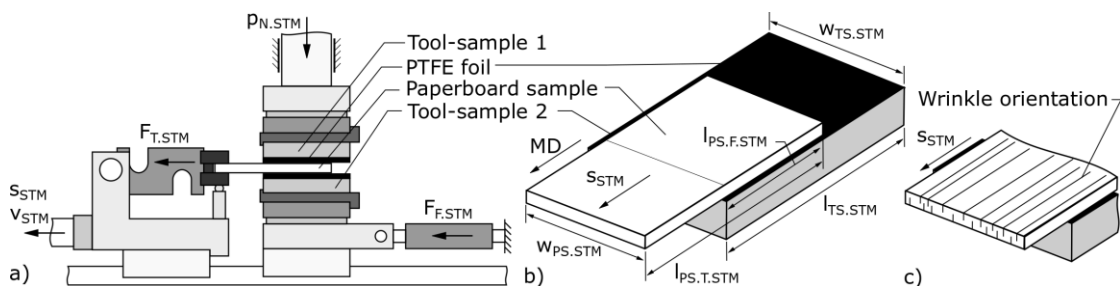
a) Schematic side-view of the Strip-testing method (STM) according to Lenske *et al.* (2017b) with tool-samples prepared with PTFE-foil; b) Schematic detail-view of tool-sample 2 and a paperboard sample; c) Schematic detail-view of tool-sample 2 and a paperboard sample with wrinkle formation
